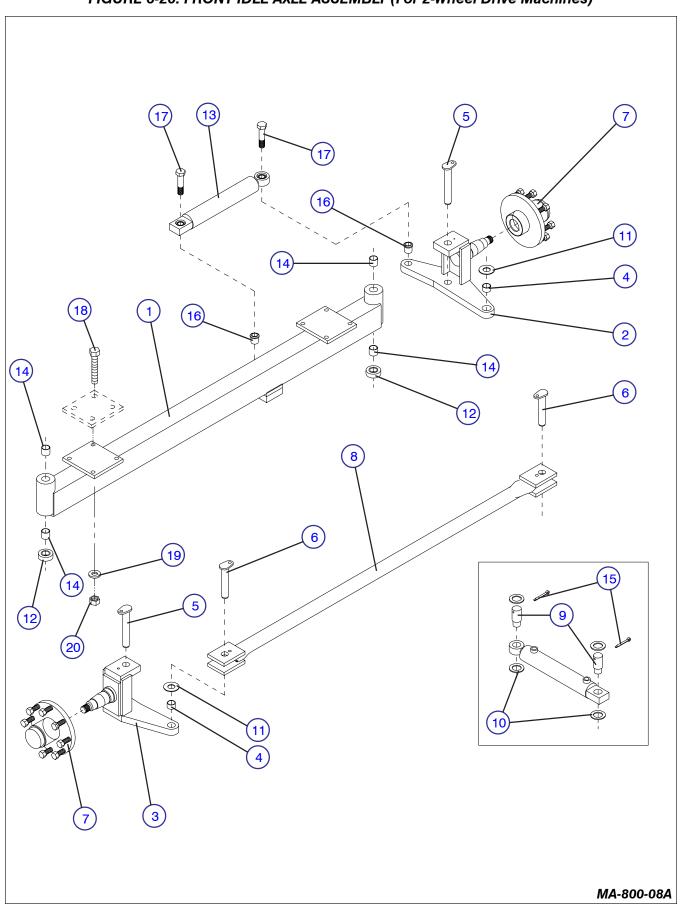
FRONT IDLE AXLE ASSEMBLY (For 2-Wheel Drive Machines)
